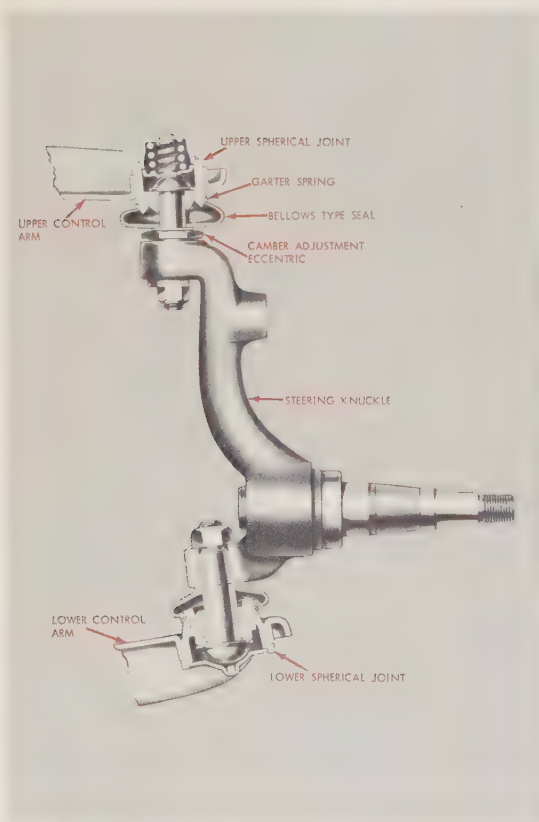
The upper and lower spherical joints of the front suspension system, shown here in cross section, are pressed into their respective control arms. The upper spherical joint connects the upper control arm to the steering knuckle through a camber adjustment eccentric (Fig. 6). The lower spherical joint connects the lower control arm to the steering knuckle. Periodic lubrication of the spherical joints is eliminated by the use of a permanently packed joint. A single convolution, bellows-type seal is attached securely to the housing of the joint by a stainless steel garter spring. The joint is packed with a special, high-quality lubricant. Repacking of the joint is necessary only if the seal is damaged.
